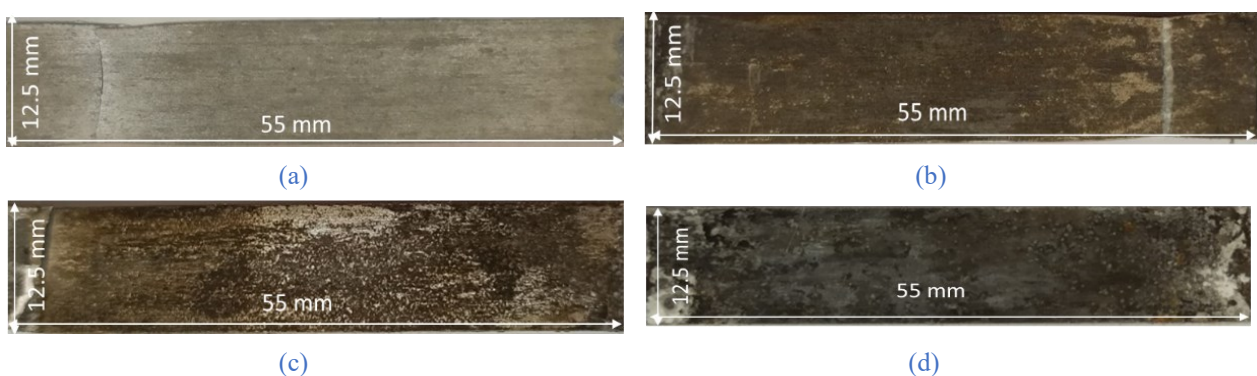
Typical photographs of fractured pre-corroded tensile specimens of AA2198-T8 exposed for (a) 168 h, (b) 720 h, (c) 2184 h and (d) 4200 h to 3.5 wt. % NaCl solution.
